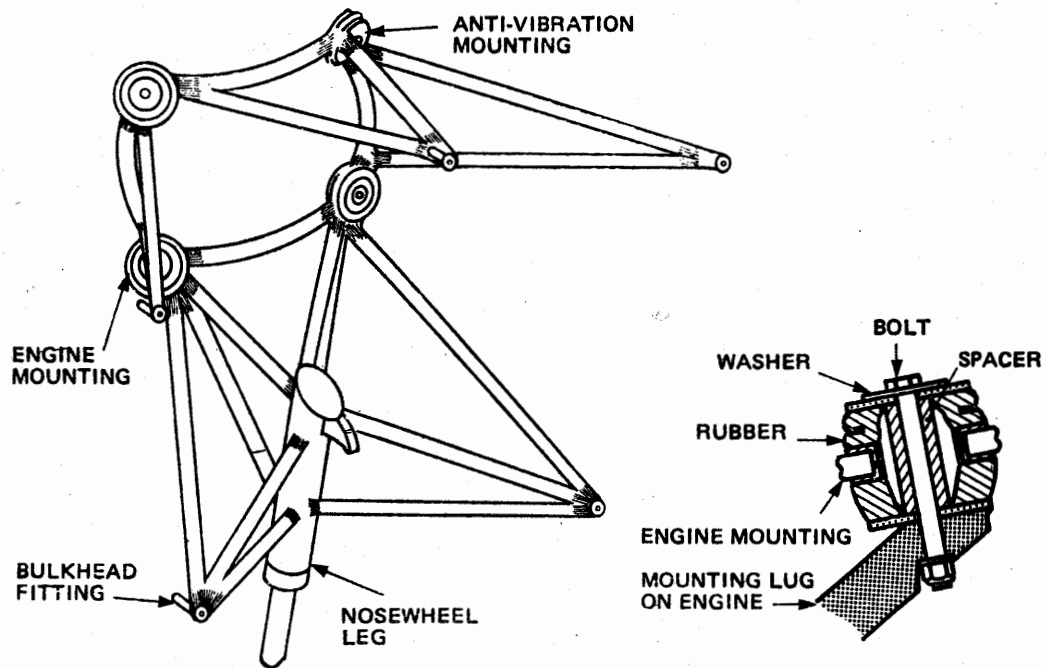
ENGINE MOUNTING FRAME Figure 2 ANTI-VIBRATION MOUNTING
